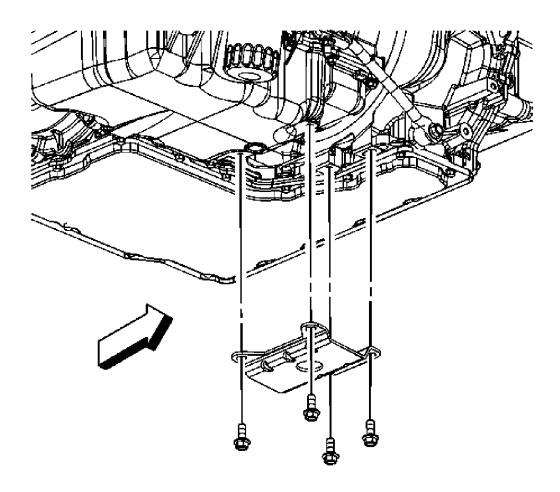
Identifying Transaxle To Engine Brace Bolts Courtesy of GENERAL MOTORS CORP.
